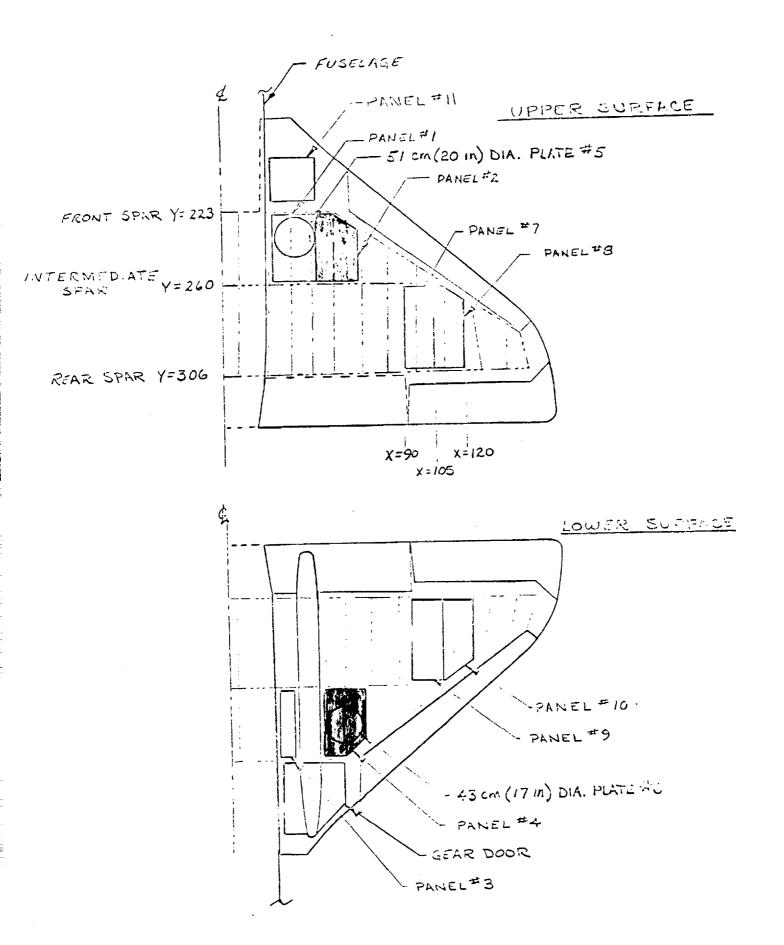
HOLE CONFIGURATION #4. PANELS 2&4 AND PLATE 6 REMOVED
